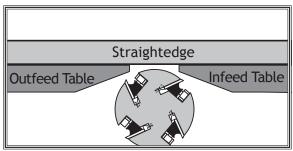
Infeed and outfeed tables set evenly (knife-style cutterhead shown).
